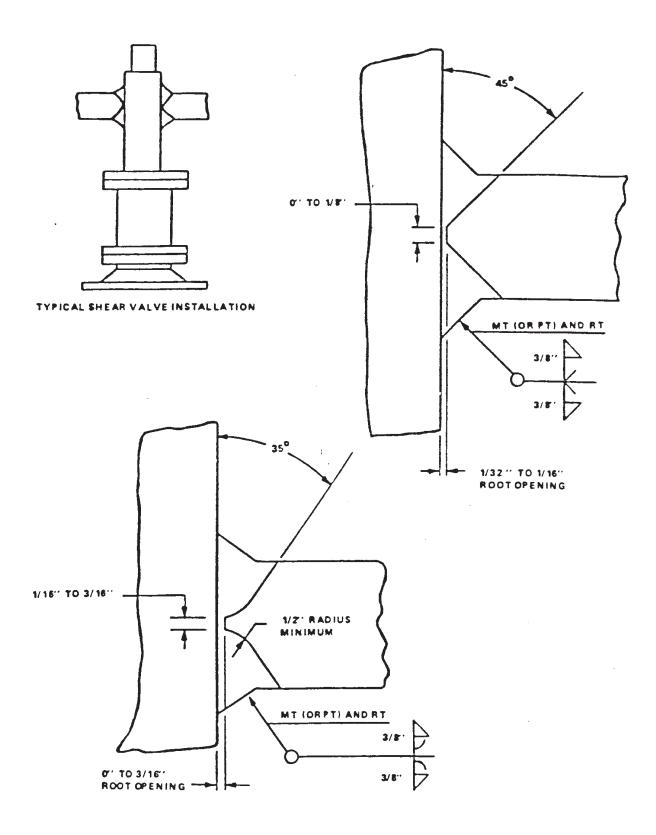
Pressure Hull Full Penetration Weld Joint Design
